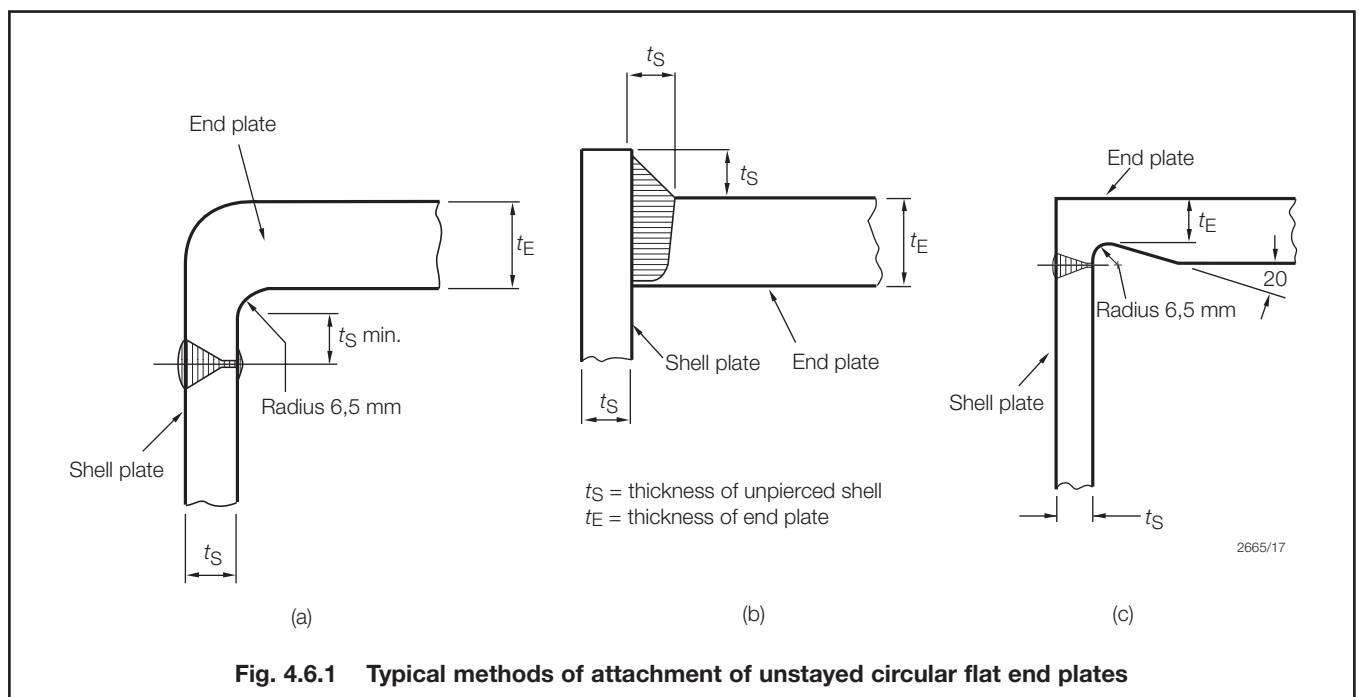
Typical methods of attachment of unstayed circular flat end plates
